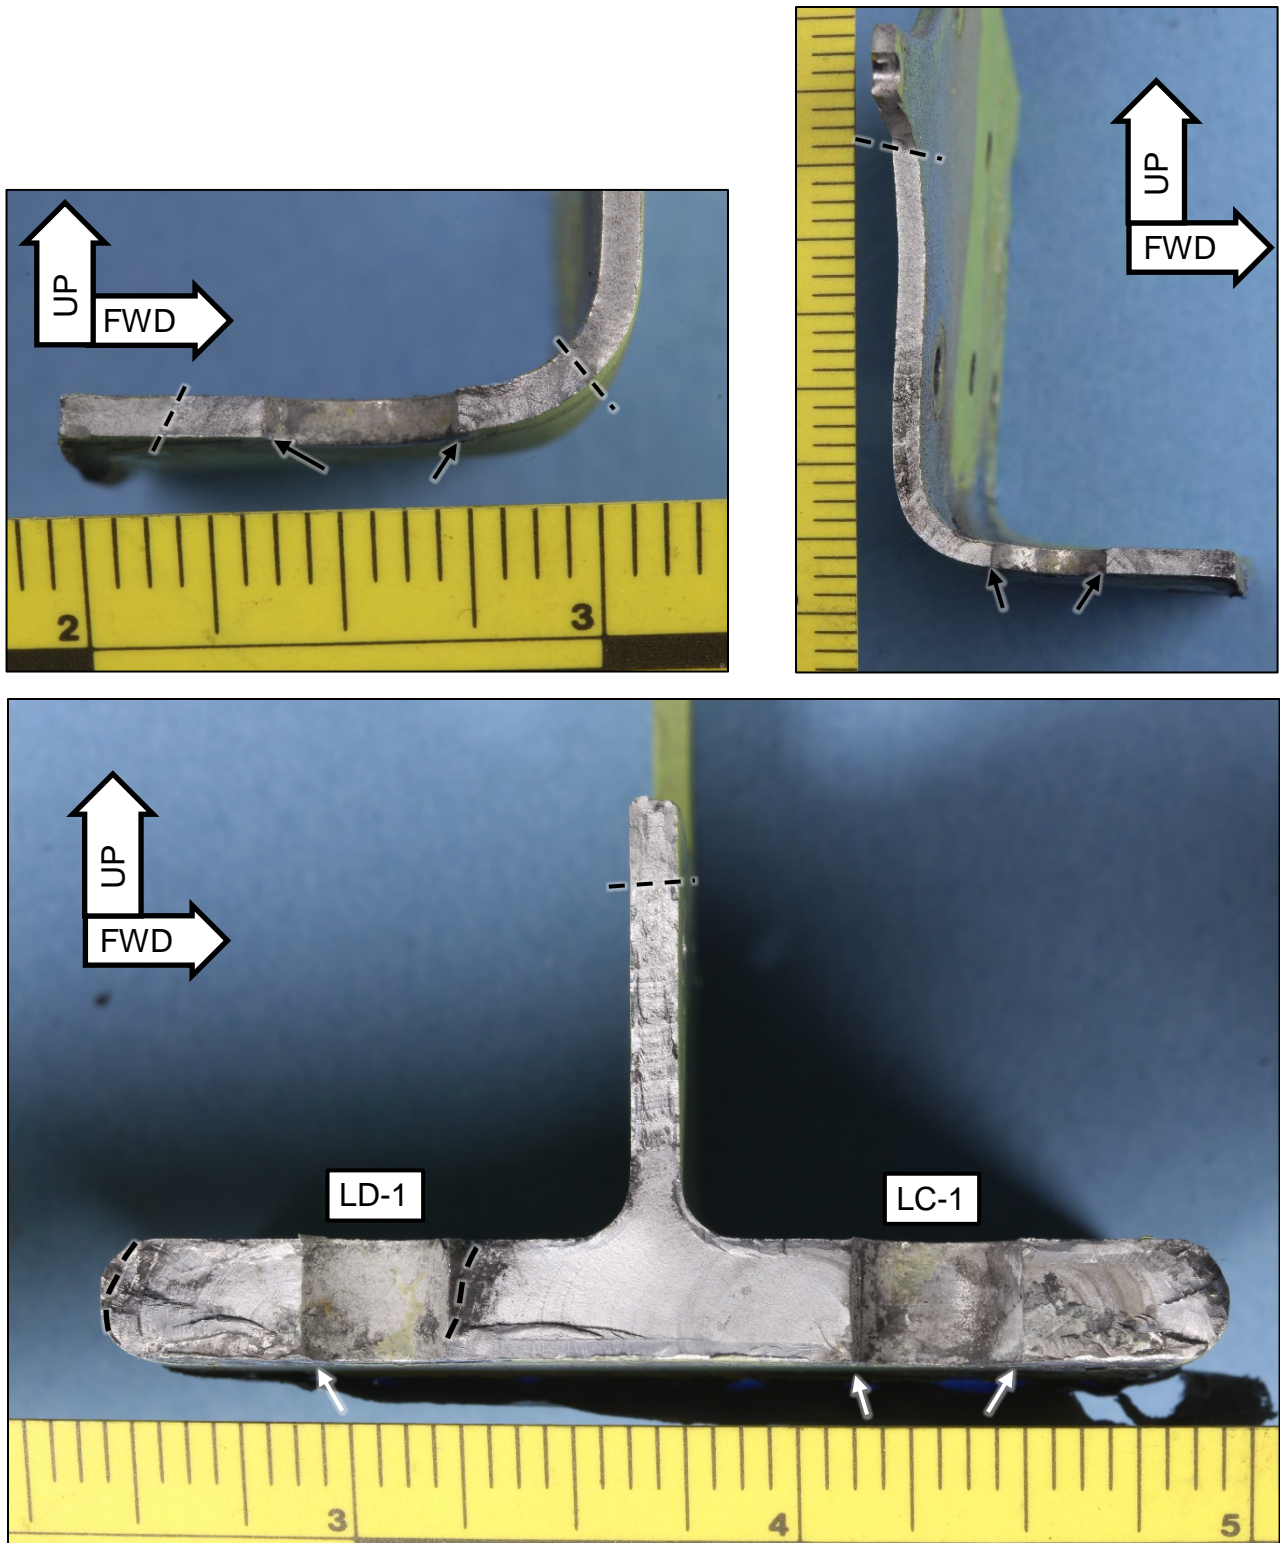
Closer views of the fracture surfaces in the doublers (upper images) and the lower spar cap (lower image) after cleaning. Unlabeled arrows indicate fatigue origin areas, and dashed lines indicate fatigue boundaries.
